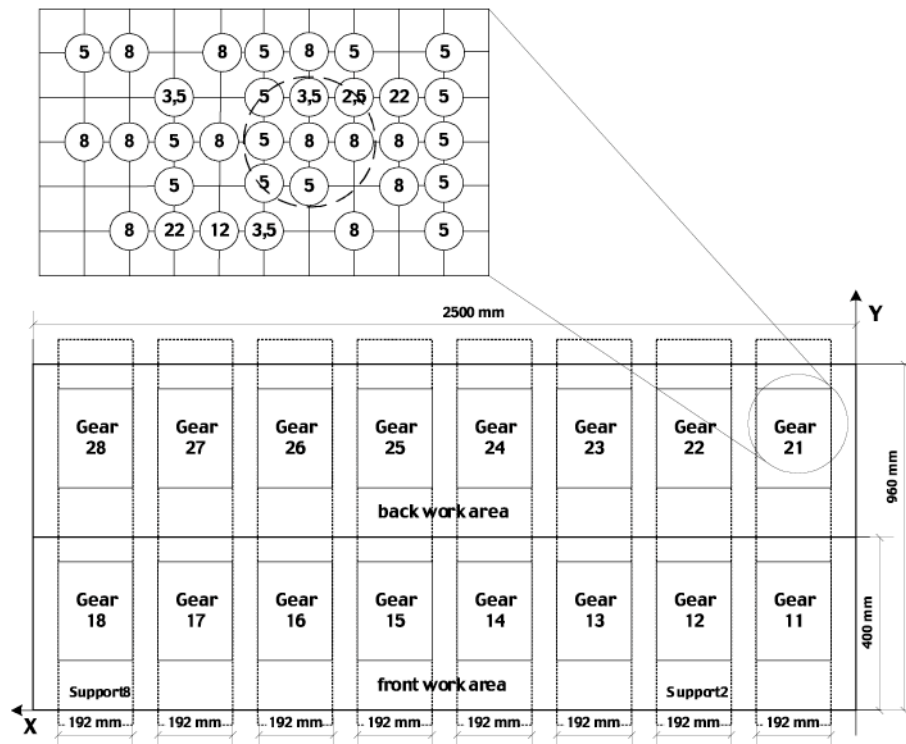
Schematic of a multi-drilling gear machine and one specific gear.
